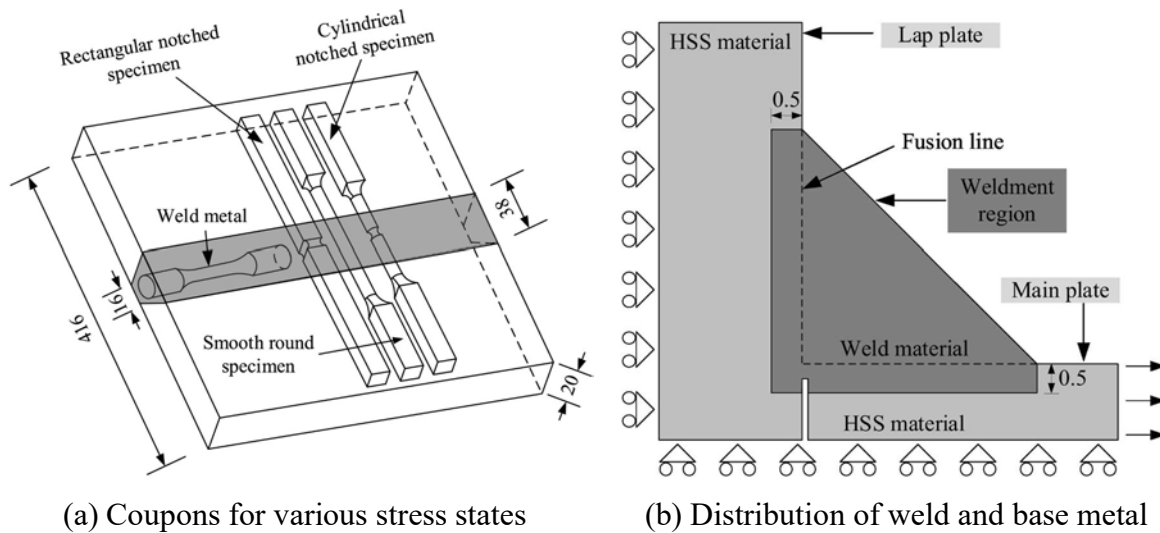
Fracture simulation of welded cruciform connections [89].
